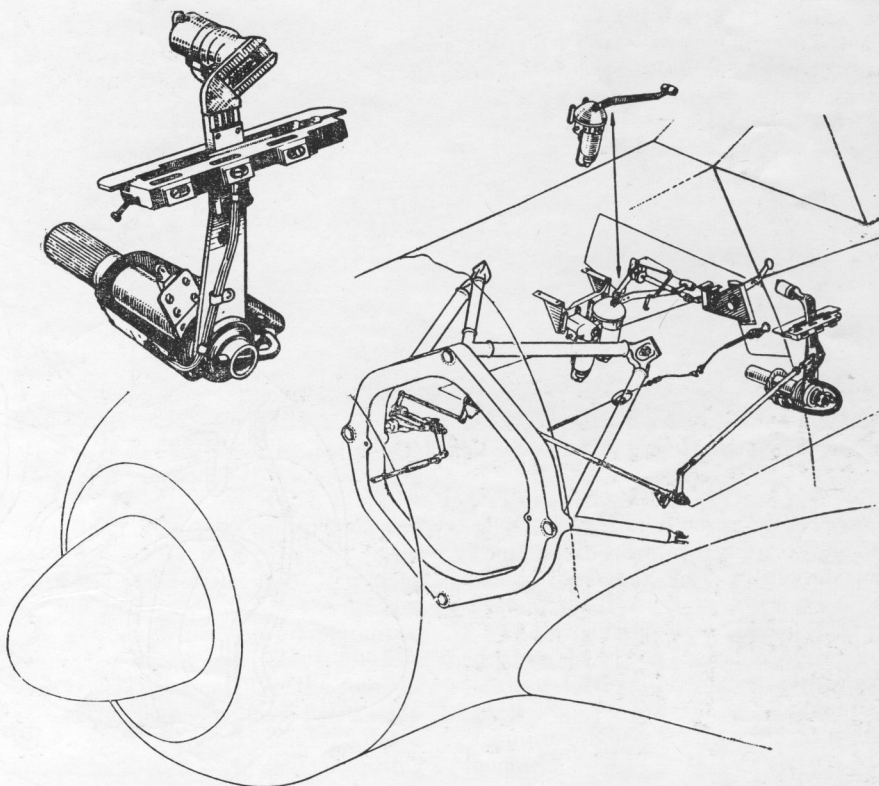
The engine-mount ring and the throttle control linkage. The detail at the upper left depicts the throttle itself.
